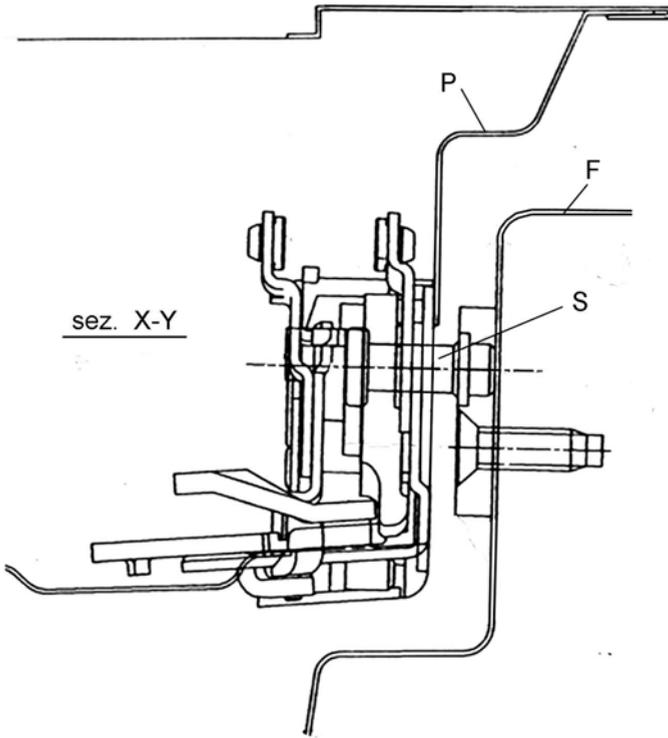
XY section of a door (P) mounted lock, with the closing end position of the striker S, mounted on body pillar F.
